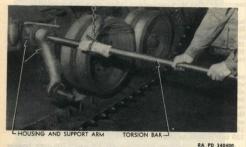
Removing Support Arm and Axle Shaft Housing Assembly
